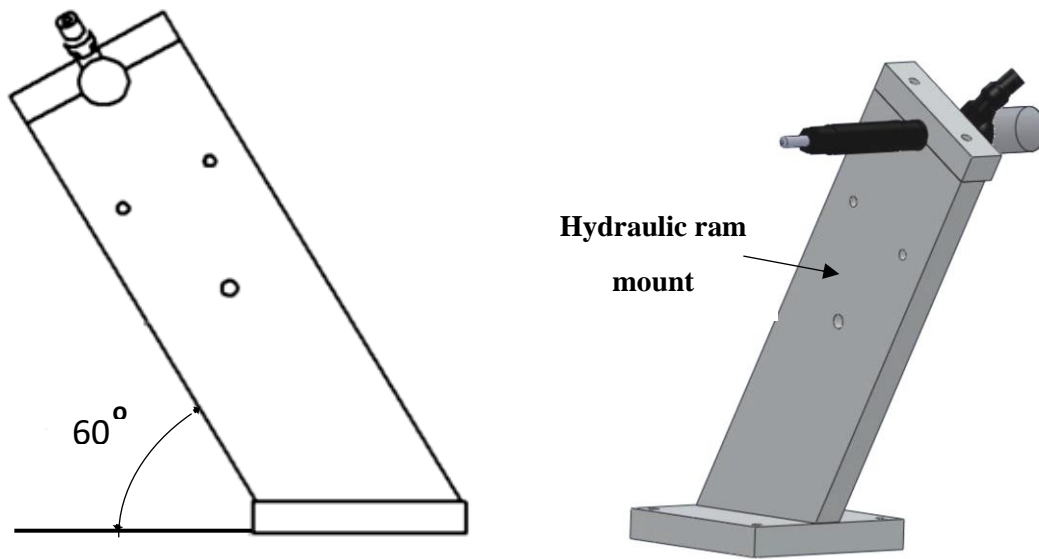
Injector holder angled at 60 degrees to prevent any interference with the emerging spray<sup>16</sup>.
